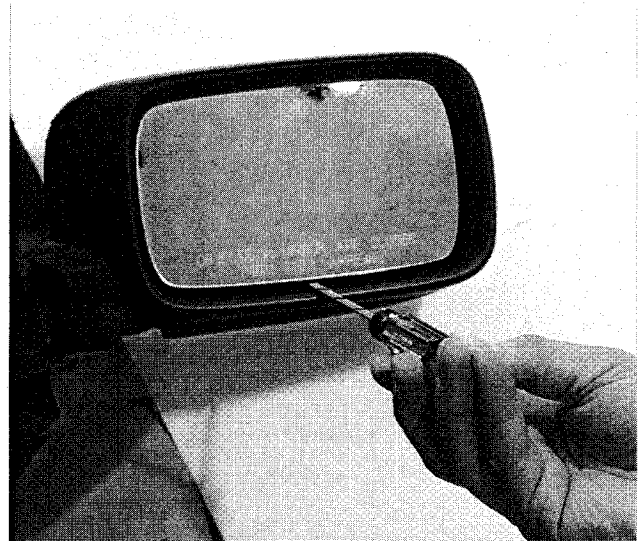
Prying mirror glass out of mirror housing. Note screwdriver shaft wrapped with tape.
